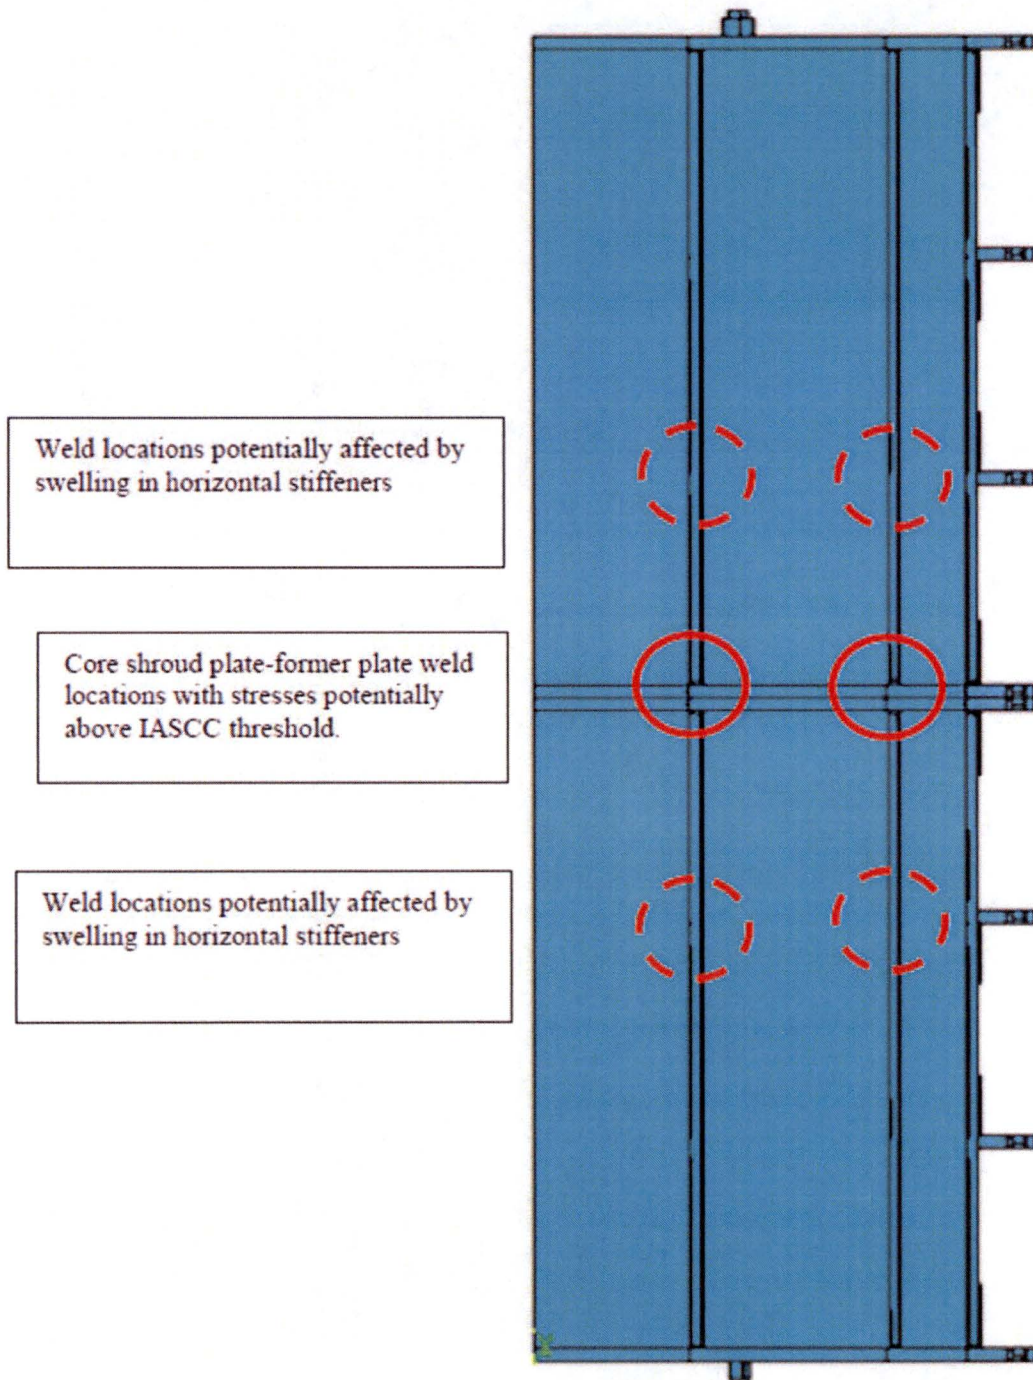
Potential Crack Locations for CE Welded Core Shroud Assembled in Stacked Sections
